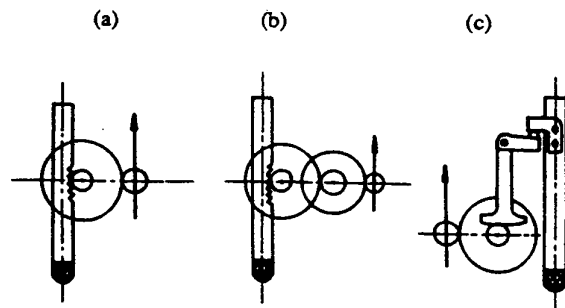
Magnifying mechanism (a), (b), (c)
